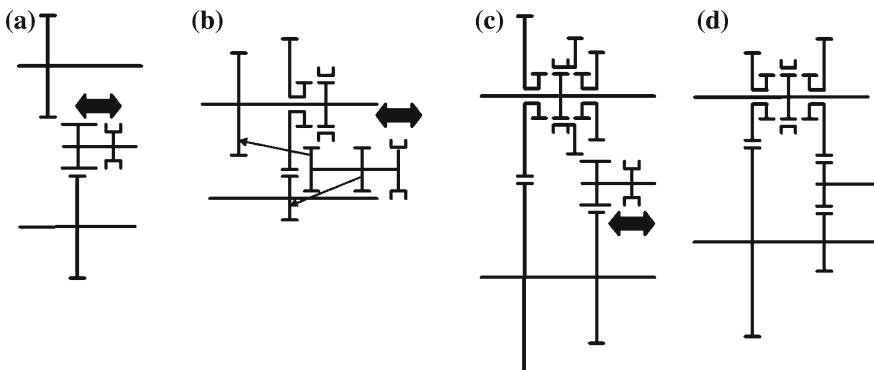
Schemes used for reverse speed; such schemes fit every type of gearbox lay-out
